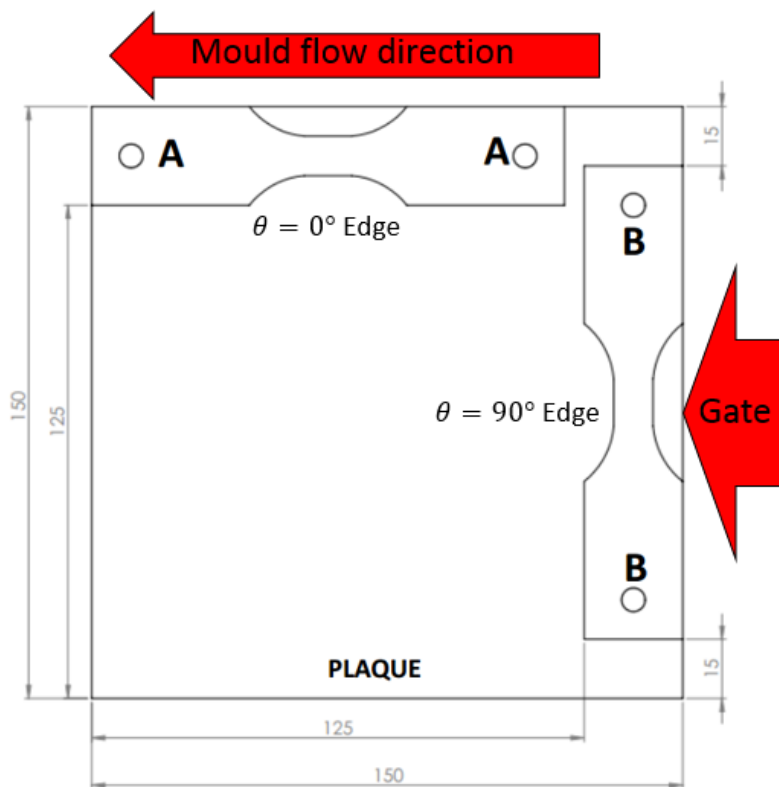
Locations for "Edge" specimens. Dimensions in millimetres.
